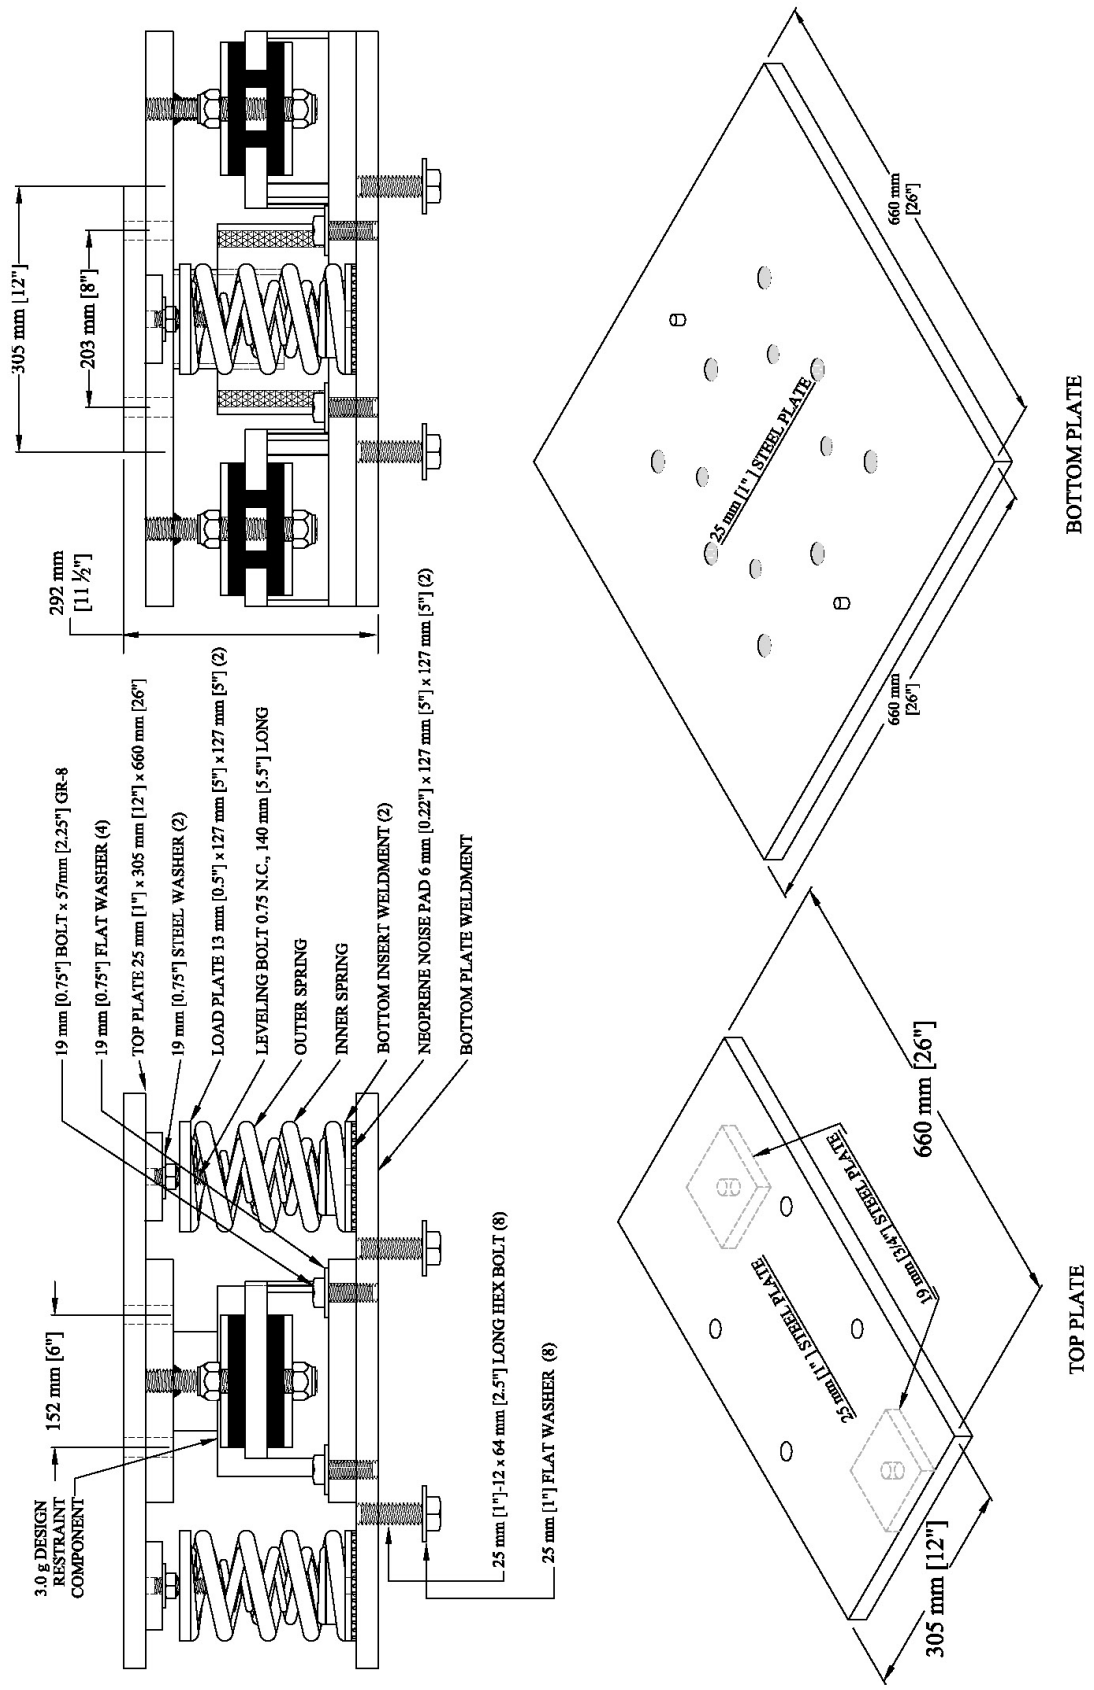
Assembly Details of 3.0 g Design ASHRAE-Type I/R System (units: mm [in])
